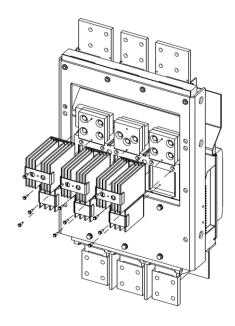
2500A-3000A BOTTOM FEED SWITCH
